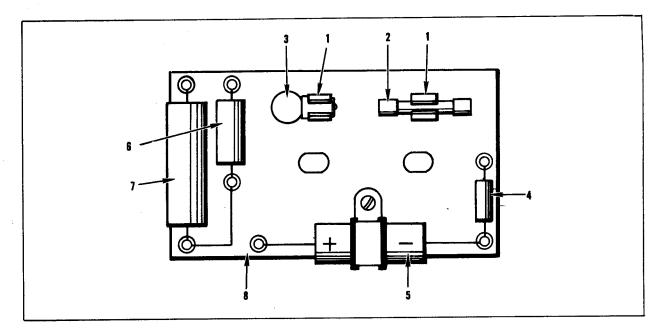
Terminal Board Assembly No. 3, Part No. 30979, Location of Parts
